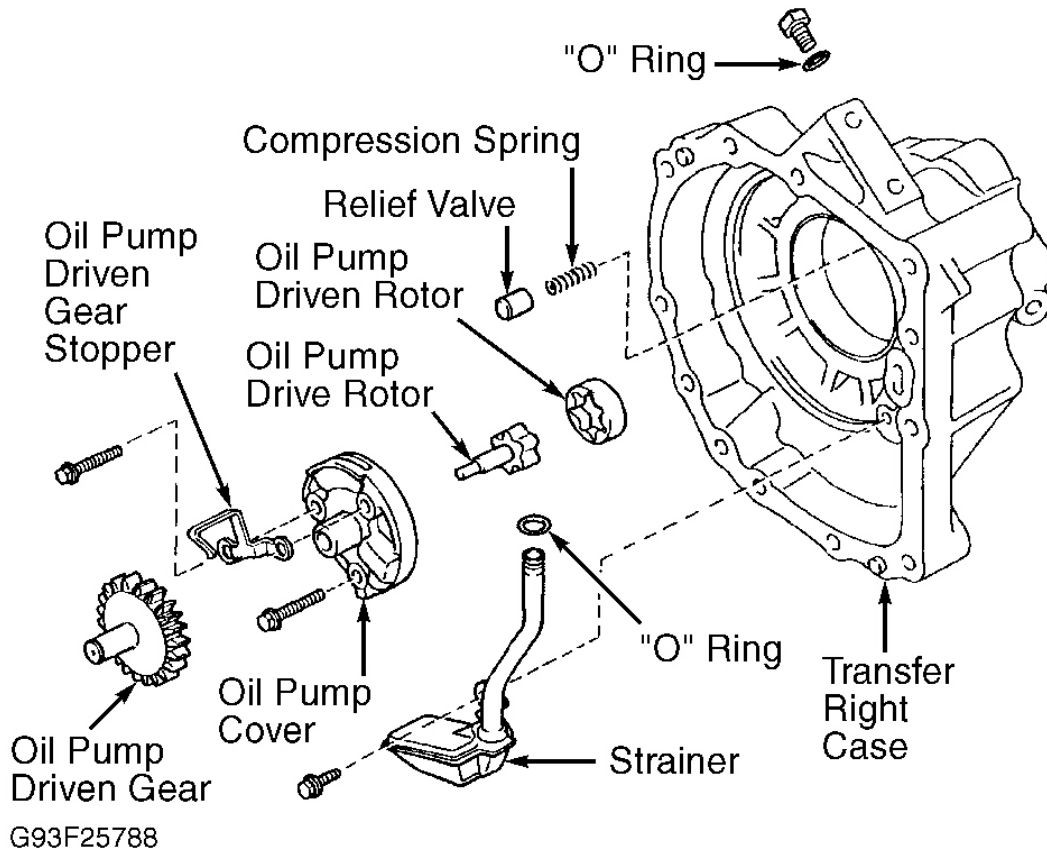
Exploded View Of Transfer Right Case (A-241H Shown; A-540H Is Similar)
